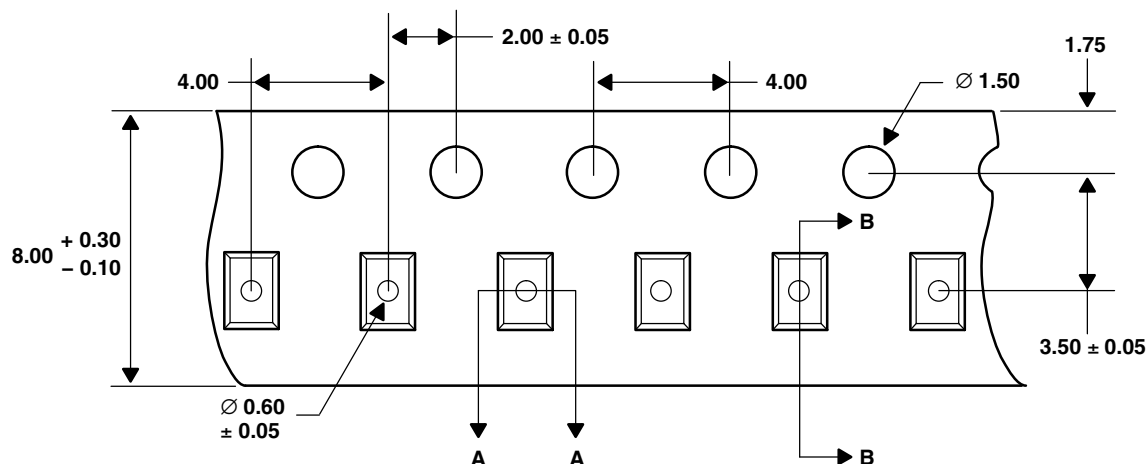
Package FN — Dual Flat No-Lead Packaging Configuration
